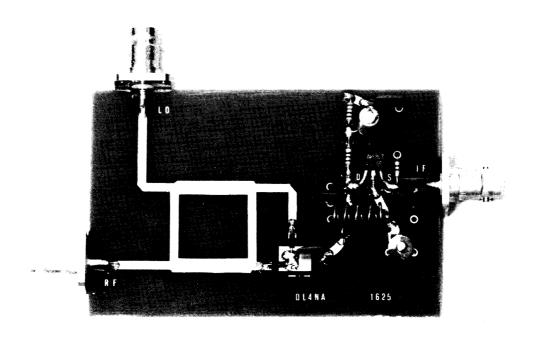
Assembled converter head without case. C3 is replaced by a foil trimmer 5-25pF. After installation in a tinplate case (110x72x30mm) the rear ground foil of the p.c. board is soldered to the case. Again, all the alignment required is to tune C3 for maximum signal. A BF245 may be used should no P8000 be available. This does, however lead to a slight reduction of gain, large signal handling and noise properties.
